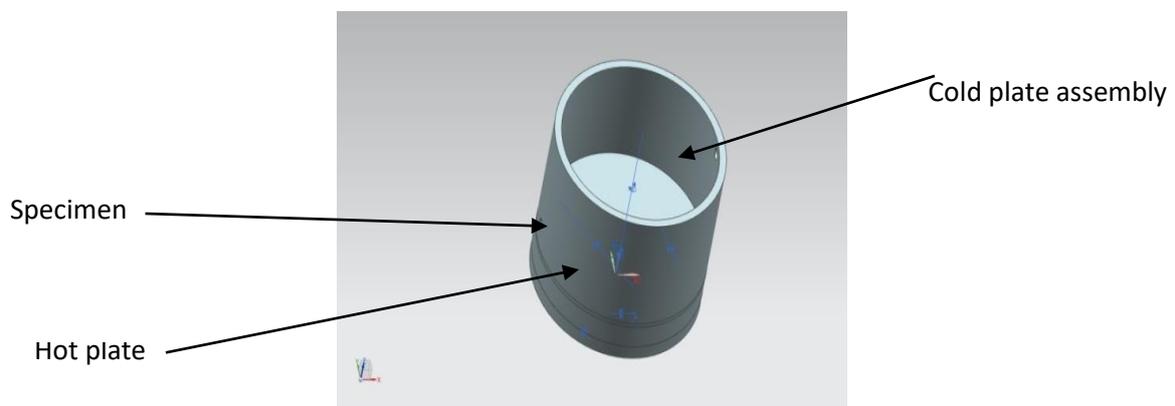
Assembly of a Hot Plate and Cold Plate
